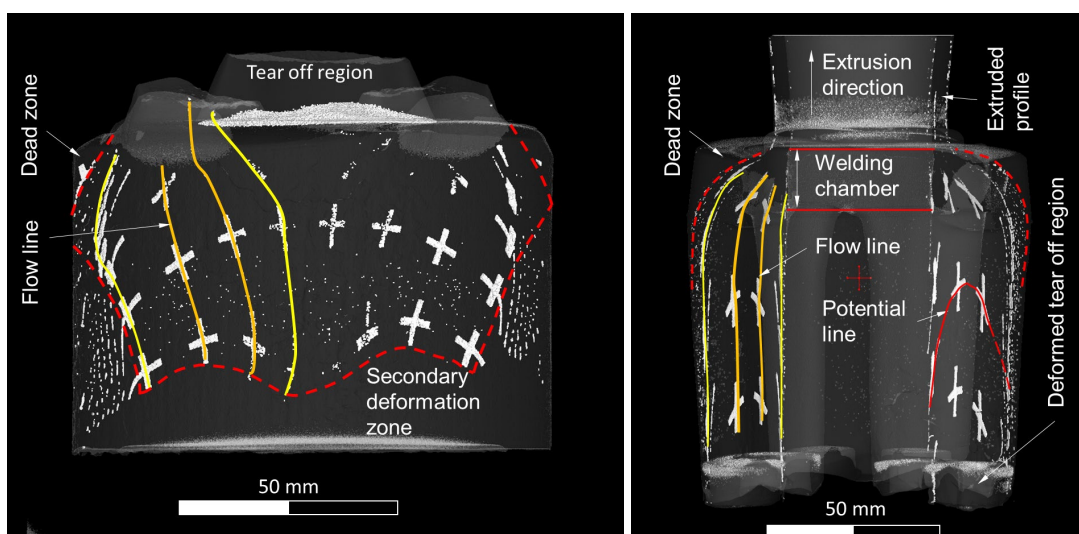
Maximum intensity projection of CT-data for remainder (left) and extracted material from the welding chamber (right) after extrusion of billet 8
